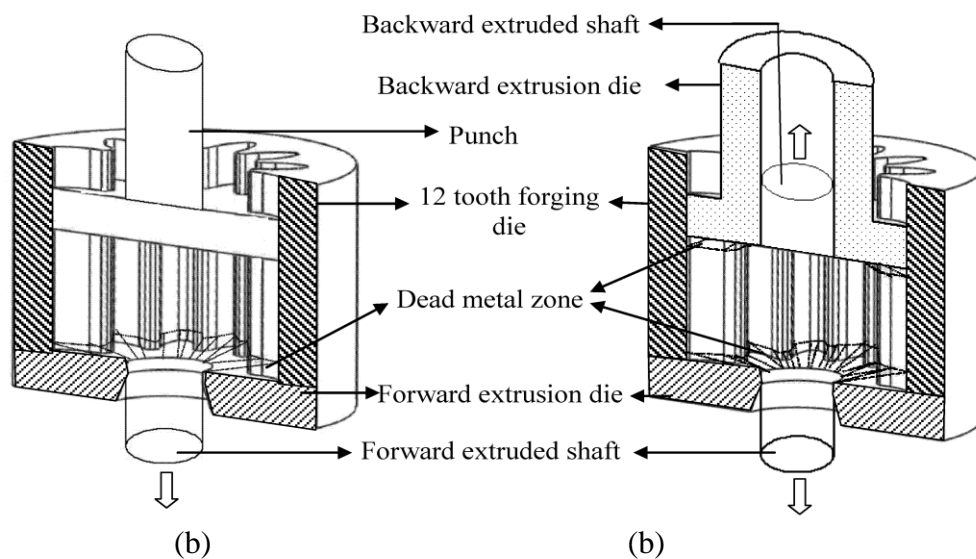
Cavity formed by the dead metal zone for 12-tooth spur gear (a) forward and (b) forward-backward extrusion-forging process
